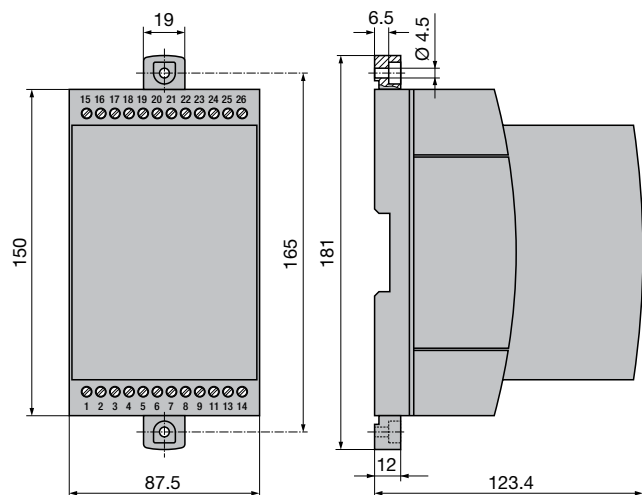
SINEAX DME in housing T24 screw hole mounting brackets pulled out.
